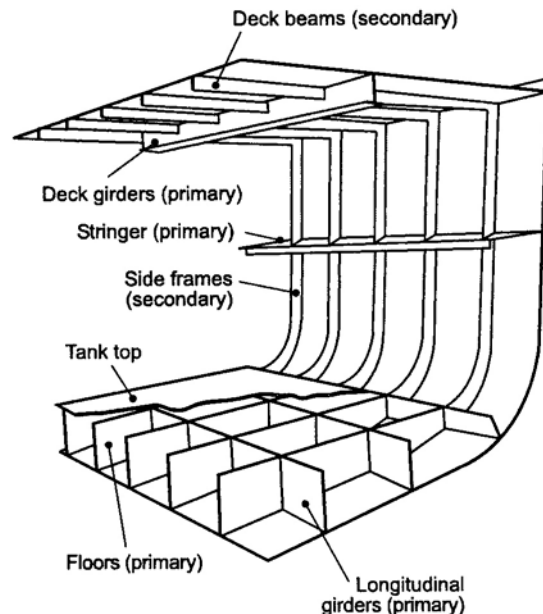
Definitions of primary and secondary stiffening members of the hull structure (transverse framing system)
